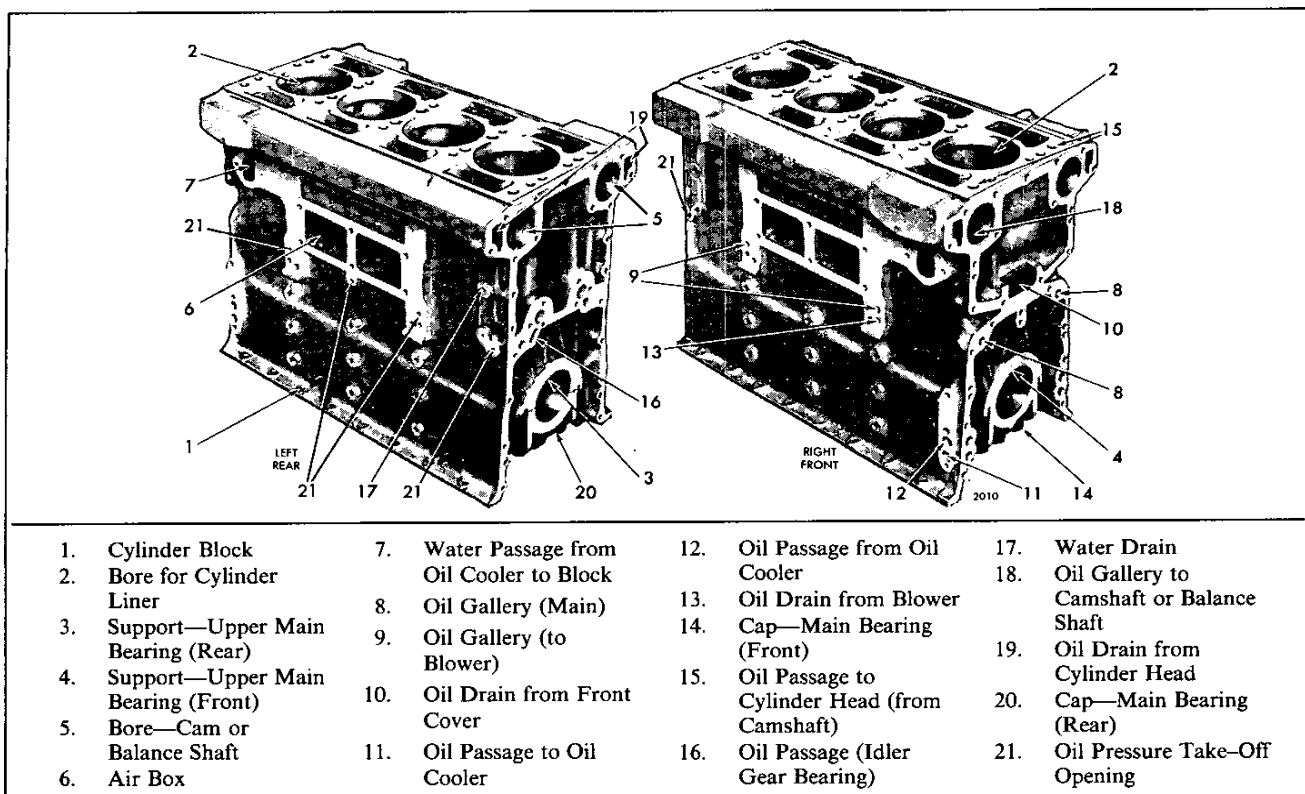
Cylinder Block (4–53 Cylinder Block Shown)
